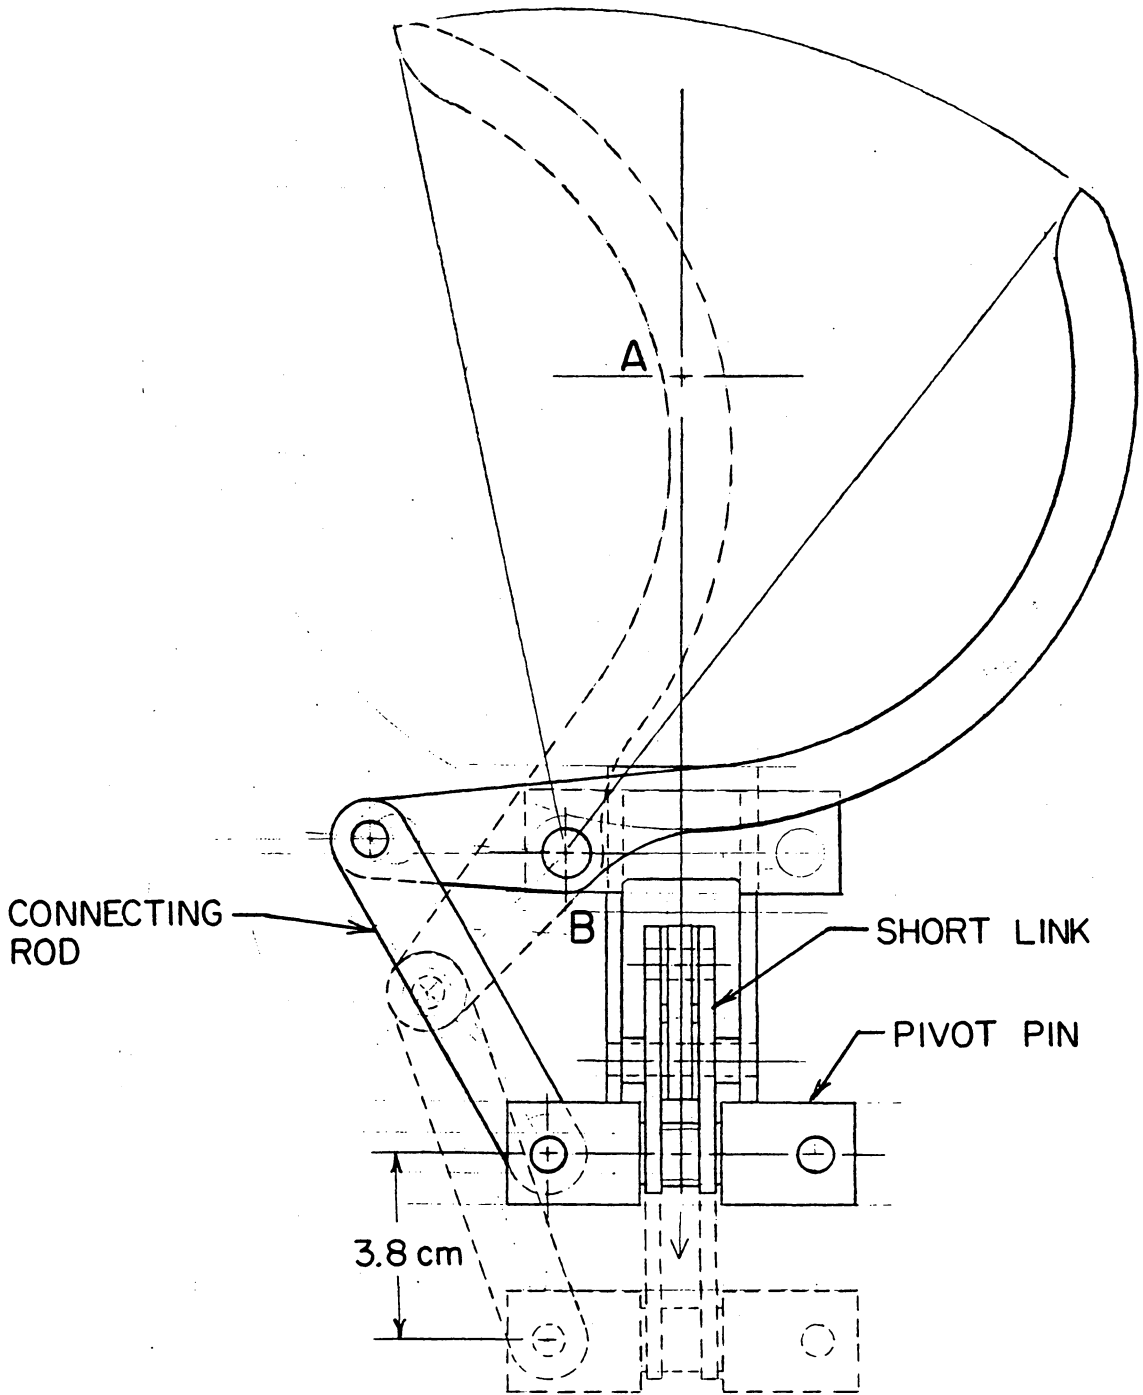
Bottom view of the cutting mechanism with one of the blades removed.
